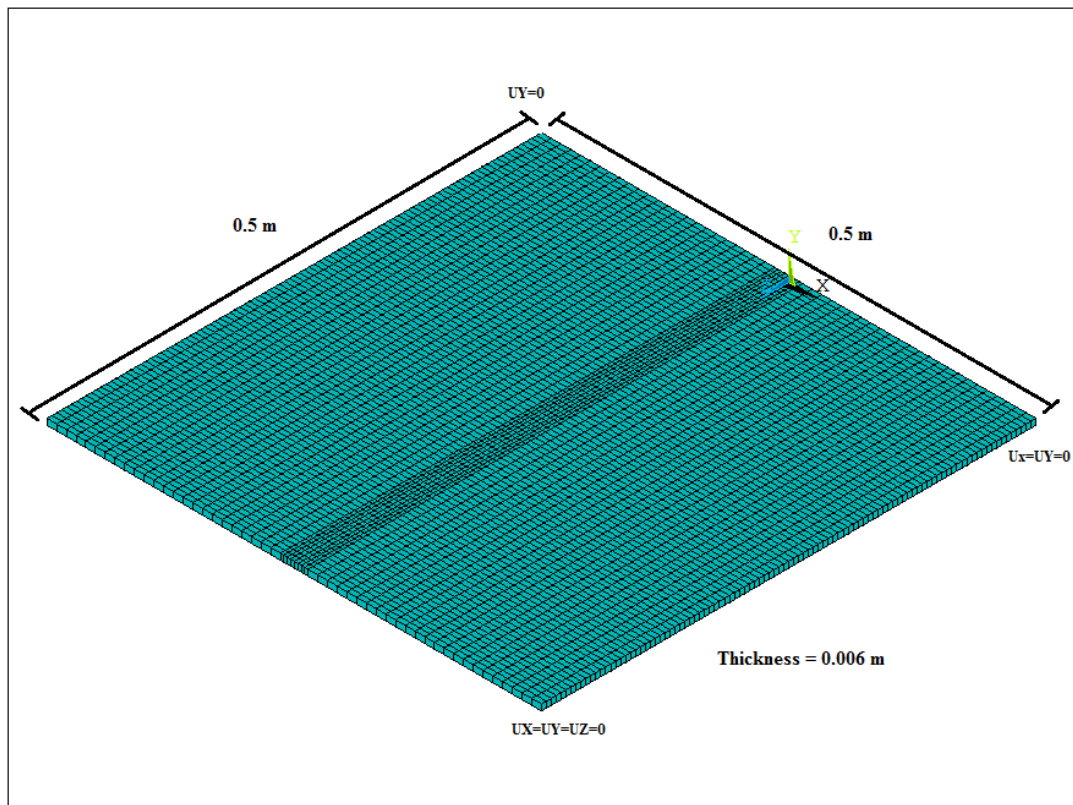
Butt Welding Geometry and Boundary Conditions
